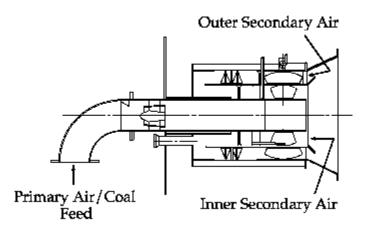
Schematic drawing of the Babcock & Wilcox XCL Burner.[5] A coal impeller may also be added in the primary burner barrel to accommodate short firing depths.
